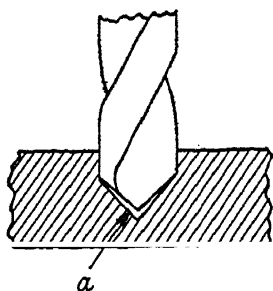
REGRINDING A DRILL POINT TO OVERCOME WORK-HARDENING
